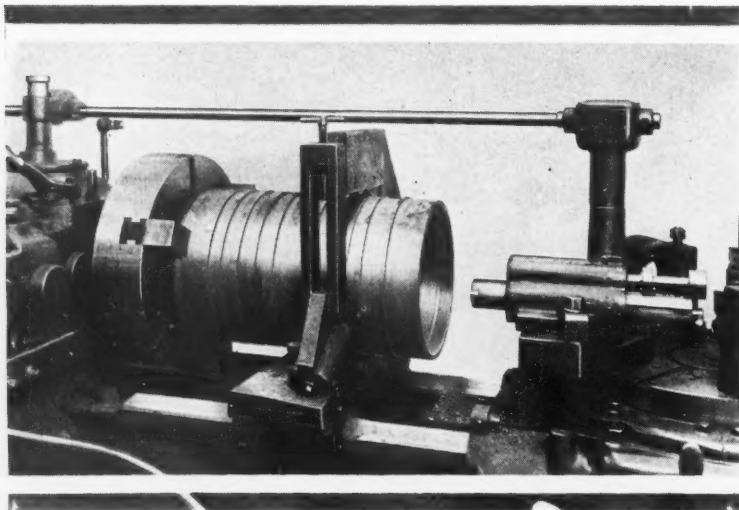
Jones & Lamson Turret Lathe Tooled for Boring, Necking, Chamfering, and Threading Operations on Cast-iron Cam-drums. Floor-to-floor Time, 30 Minutes—Note Steadyrest Capable of Crosswise Adjustment
